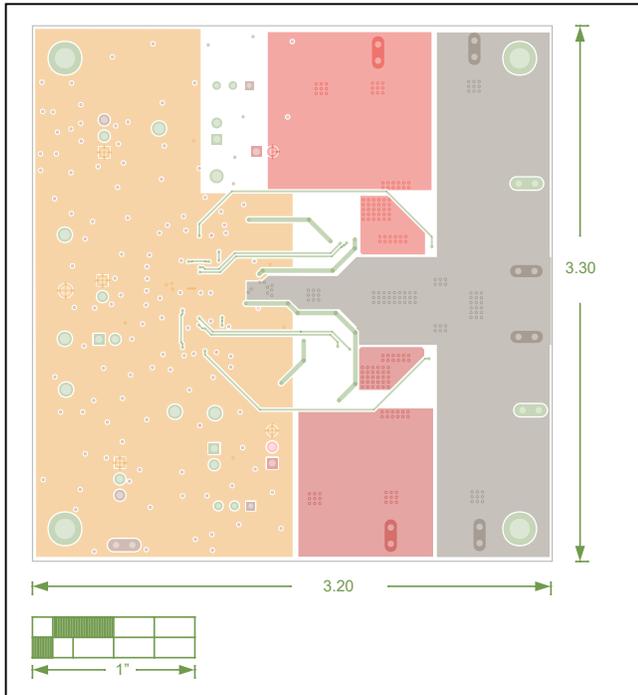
MAX20097 EV Kit PCB Layout—Inner Layer 2
